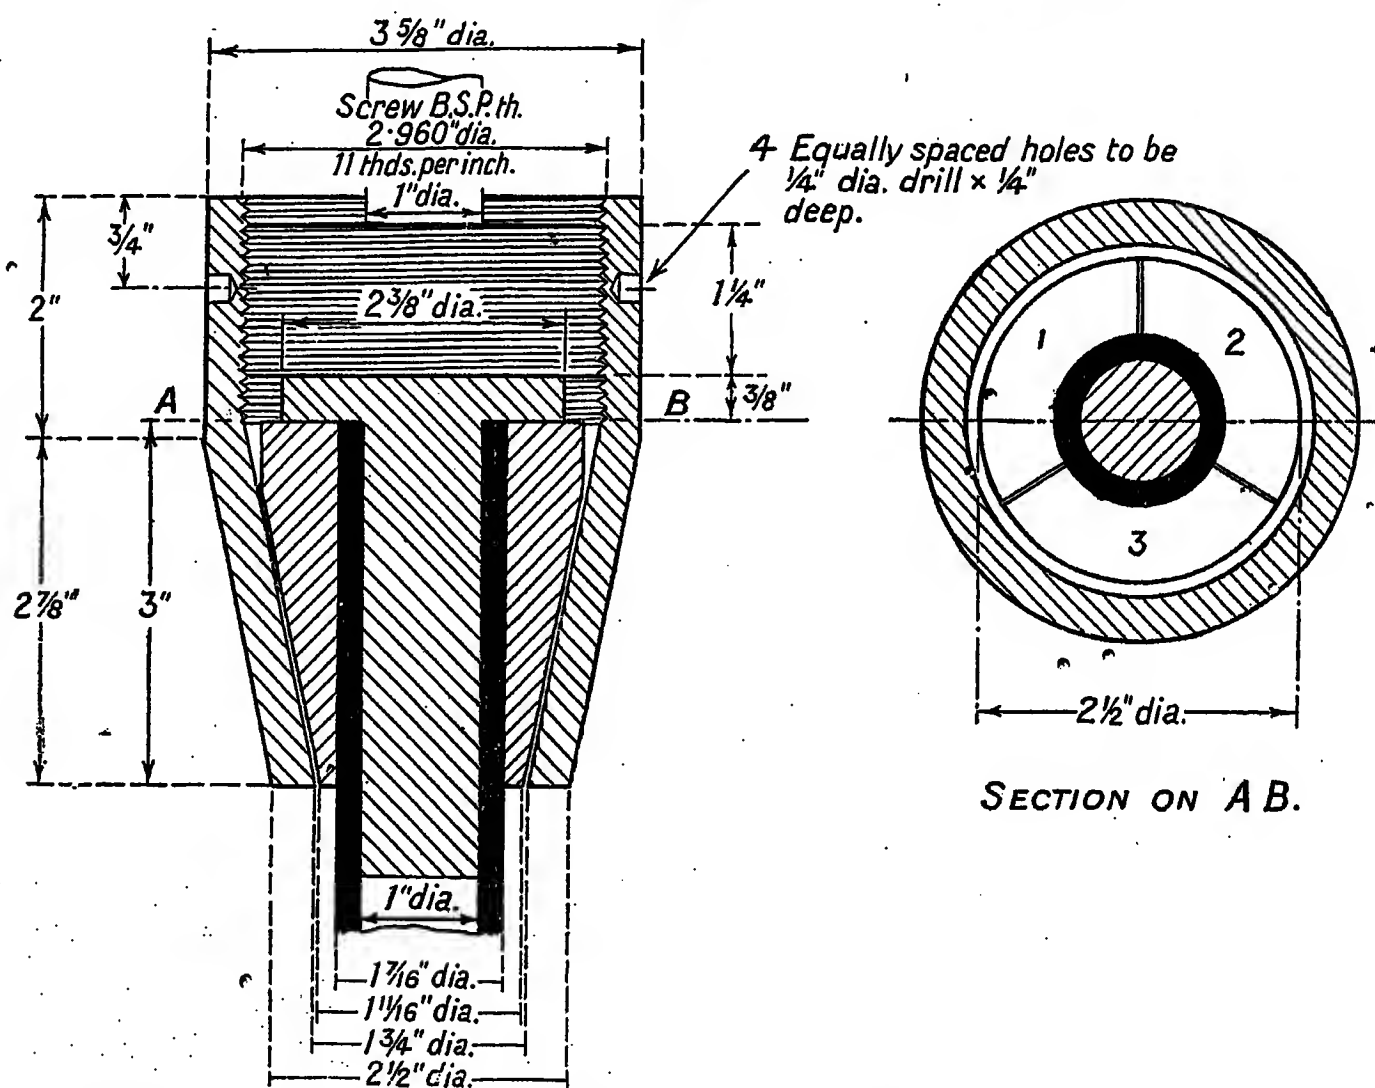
Form of Grip for holding Tube in Testing Machine for Tensile Strength and Extension Tests.
